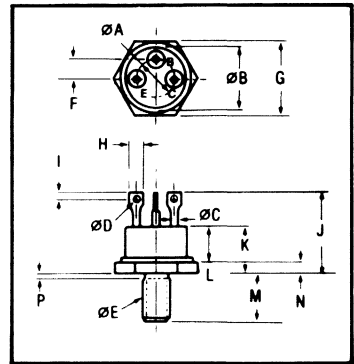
Dimensional Outline JEDEC TO-61, Isolated Collector Package
